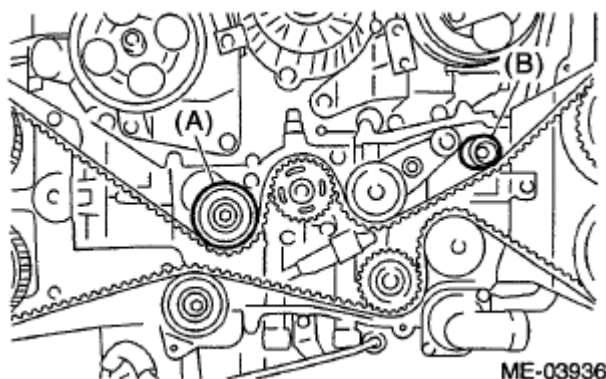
Identifying Automatic Belt Tension Adjuster Assembly And Belt Idler
